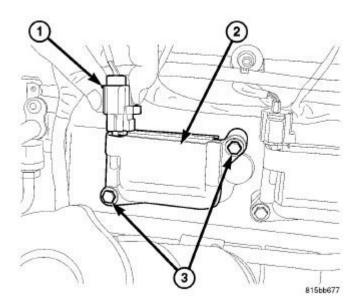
Ignition Coil Mounting Bolts Courtesy of CHRYSLER LLC
